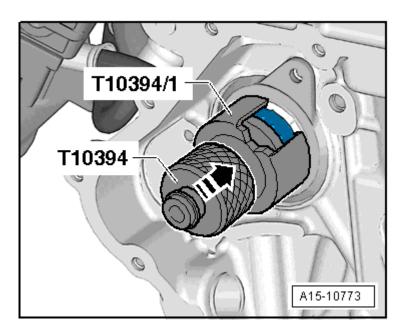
Identifying Installation Of Puller Pieces -T10394- And -T10394/1-
